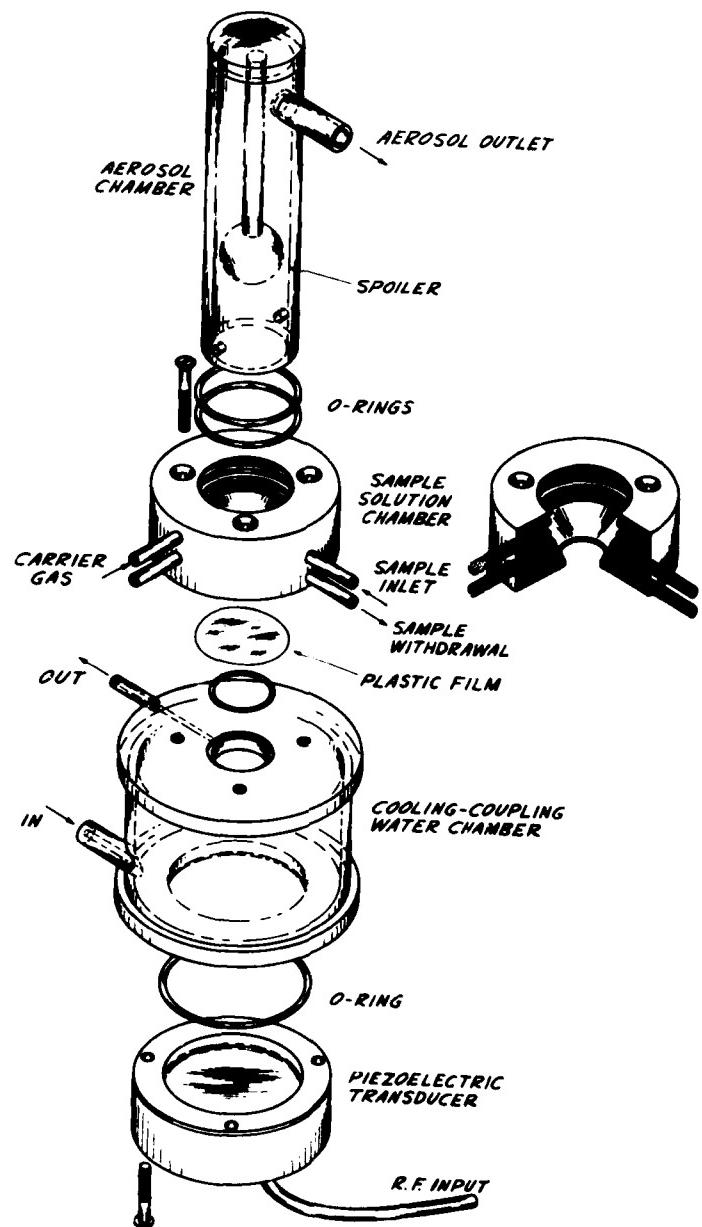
ULTRASONIC NEBULIZER ASSEMBLY
